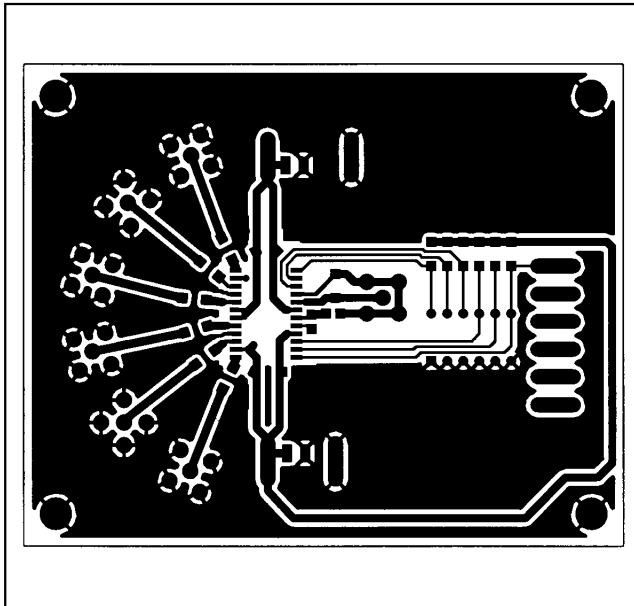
MAX4135 EV Kit PC Board Layout—Component Side
